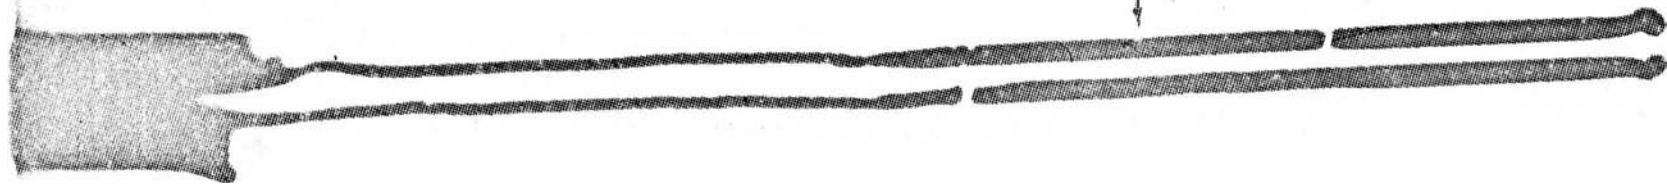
X-ray Photograph of Failure Number Three. This Enlarged Photographic Positive Print Reveals that Failure Number Three Experienced Platinum Lead Wire Fracture in Three Locations. The Wire Segment with Two Fractured Ends Was Chosen for Metallographic and Microprobe Analysis.
